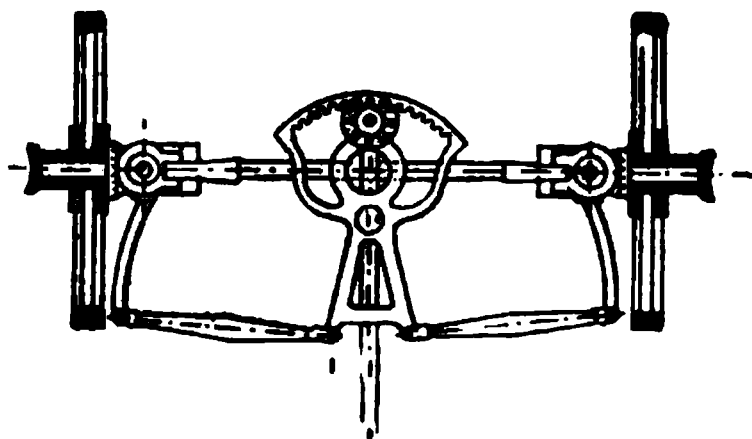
Steering Arrangement of the Amadée Bolee Steam Coach (1881). A hand wheel spindle carries a spur pinion at its base, which working on an internal geared sector, as shown, operates the bell crank, actuating the two transverse drag-links.
